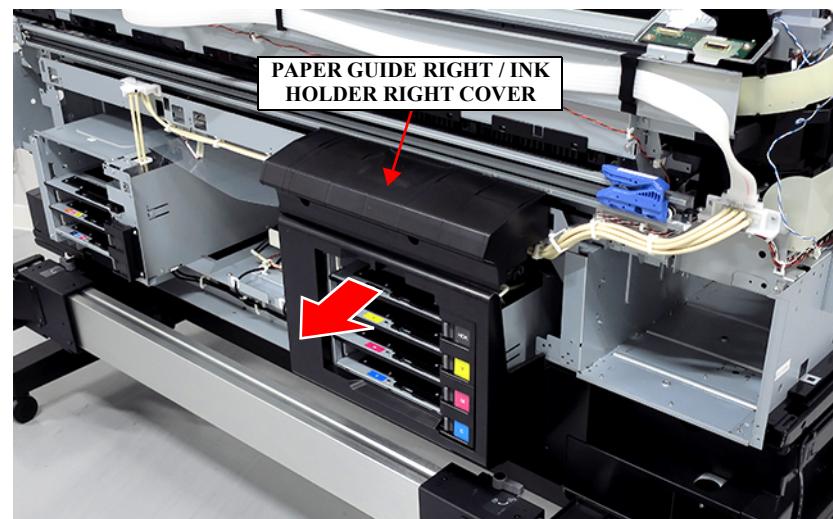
Removing the PAPER GUIDE RIGHT / INK HOLDER RIGHT COVER (2)
